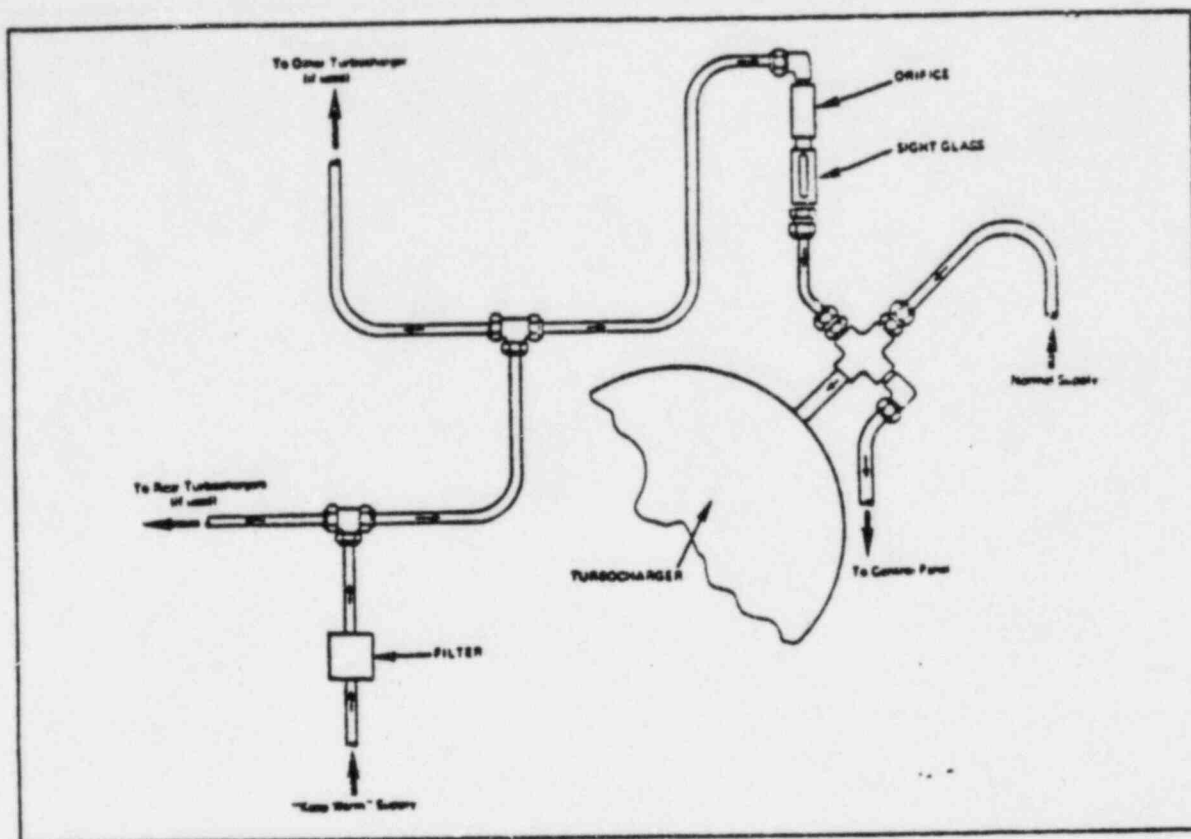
K-5. Turbocharger Bearing Drip Lubrication System
